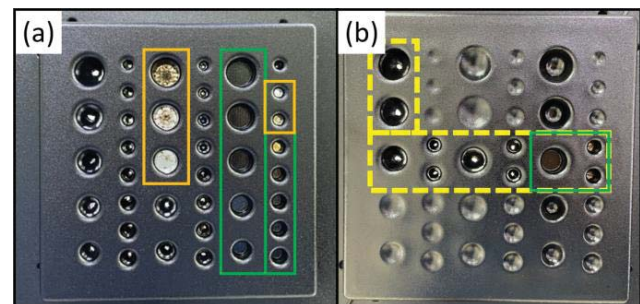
Thermoformed product using the (a) *Holes Mold (Porous)* and using the (b) *Holes Mold (Non-Porous)*. The yellow dashed lines in (b) illustrate the holes that had vent holes drilled into the *Holes Mold (Non-Porous)*.
